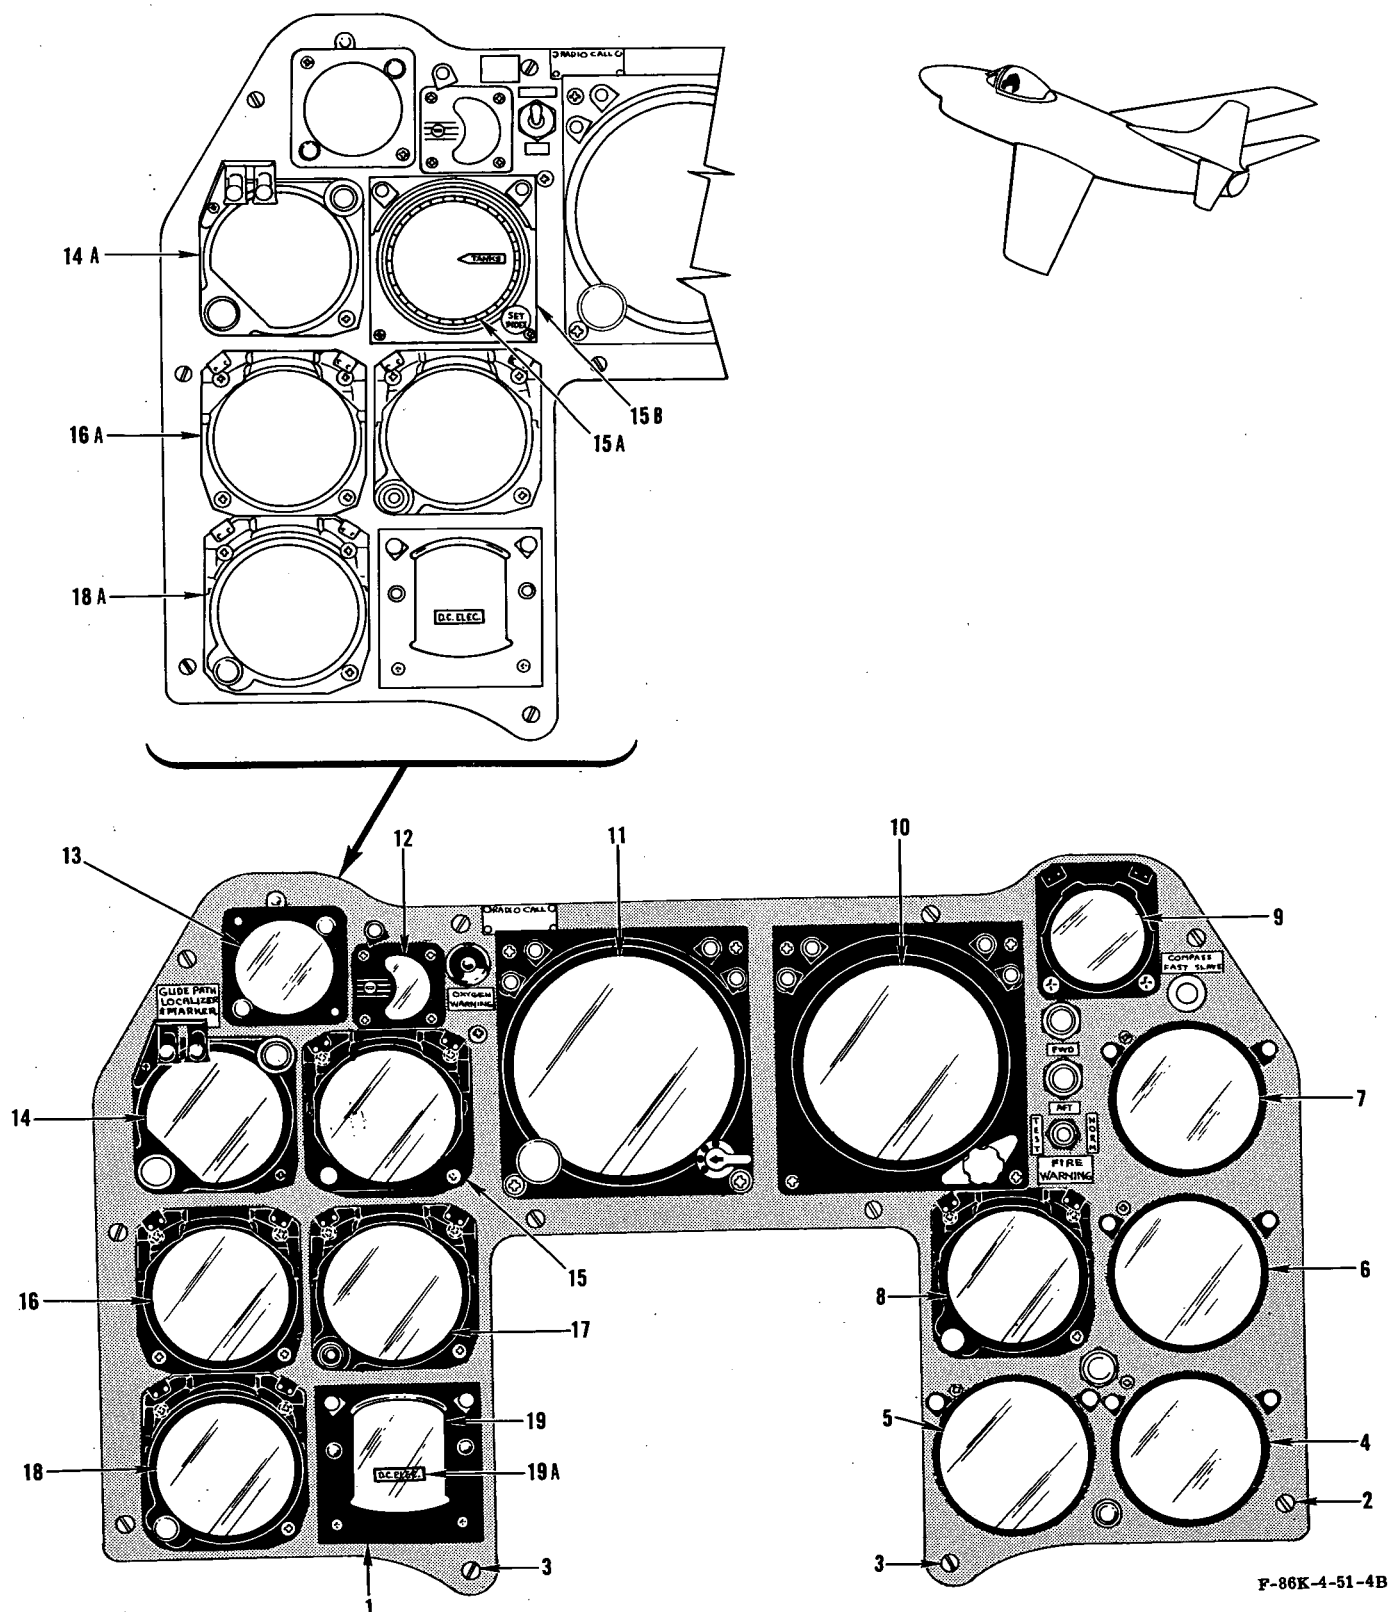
PILOTS INSTRUMENT COMPLETE PANEL ASSEMBLY
